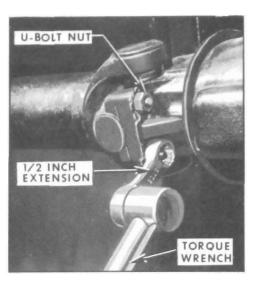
Using Extension to Torque U-Bolt Nuts
